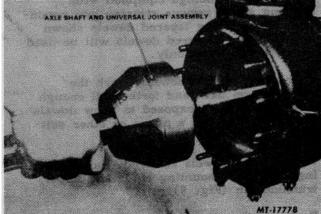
Removing Axle Shaft and Universal Joint Assembly
